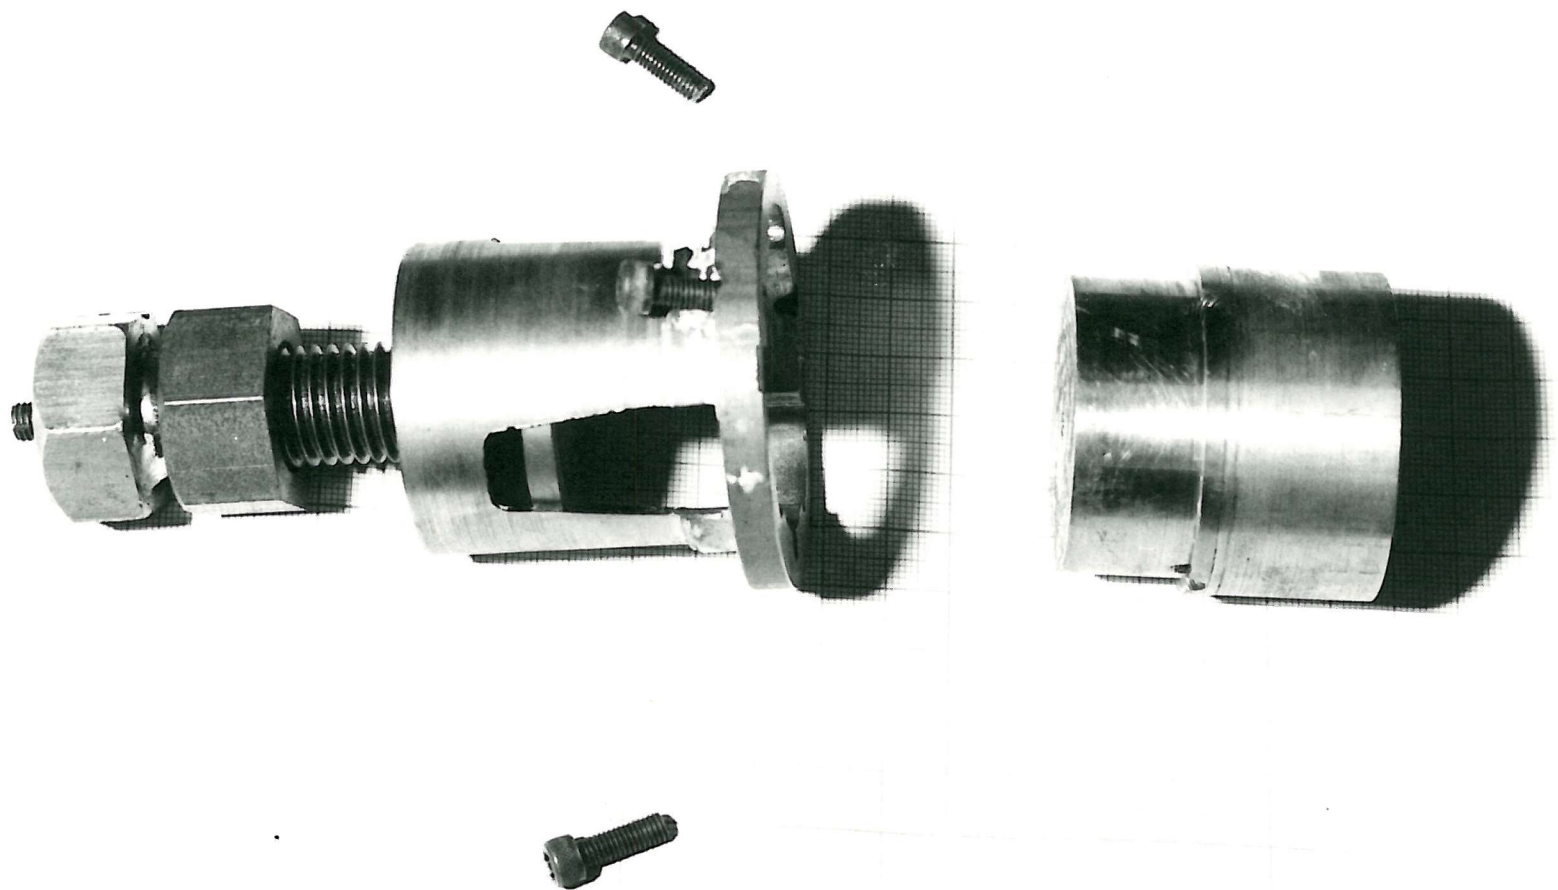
Turbine Rotor Holder Used when Machining Down Blade Tip Radius
